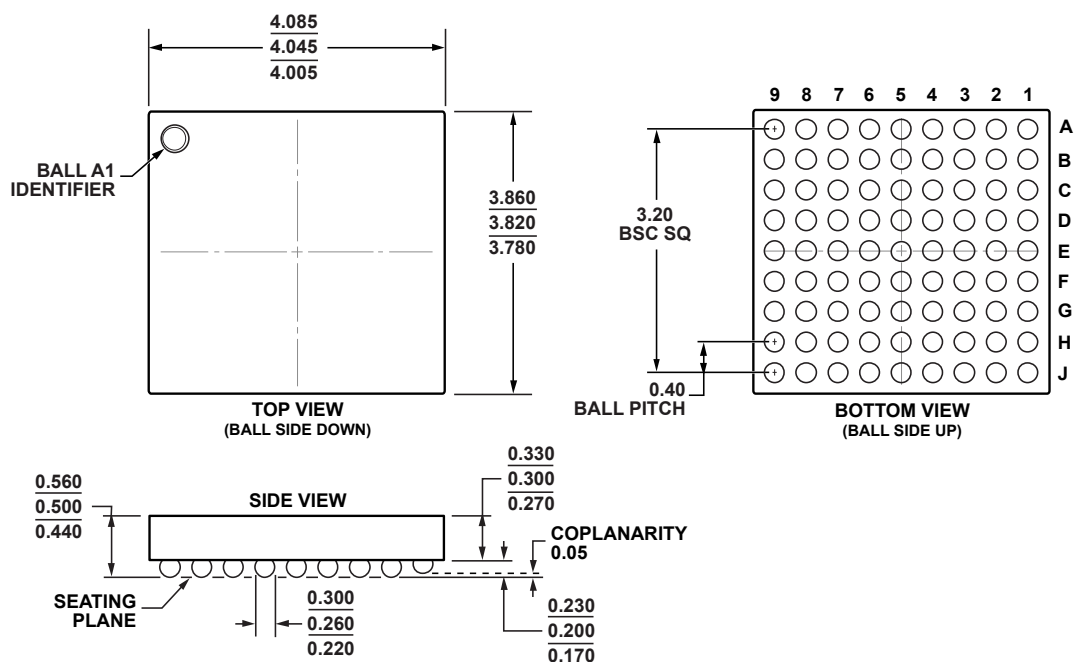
81-Ball Wafer Level Chip Scale Package [WLCSP]
